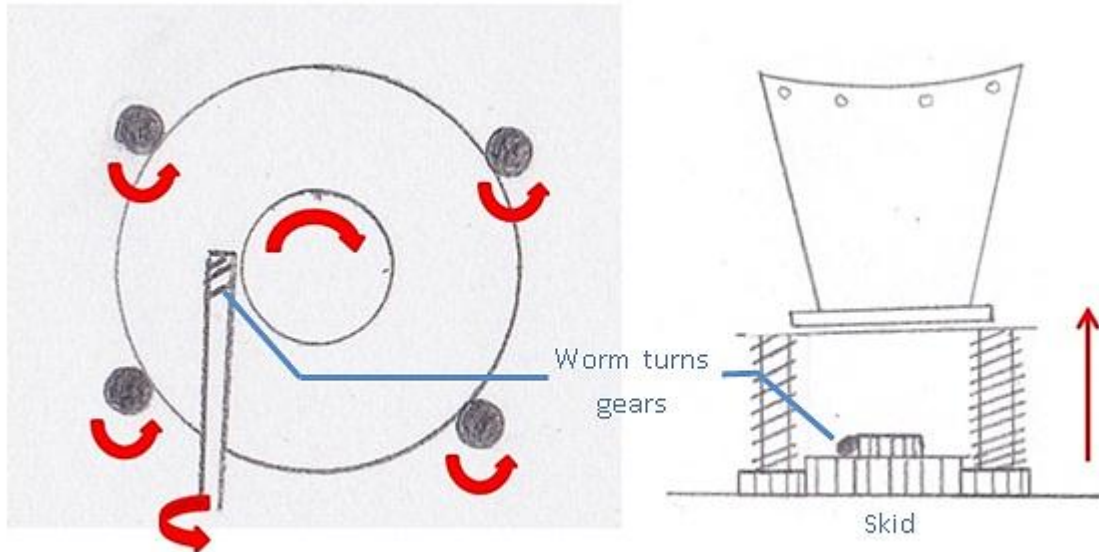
In this concept, a motor can control the vertical change in height through a series of gears and power screws.
